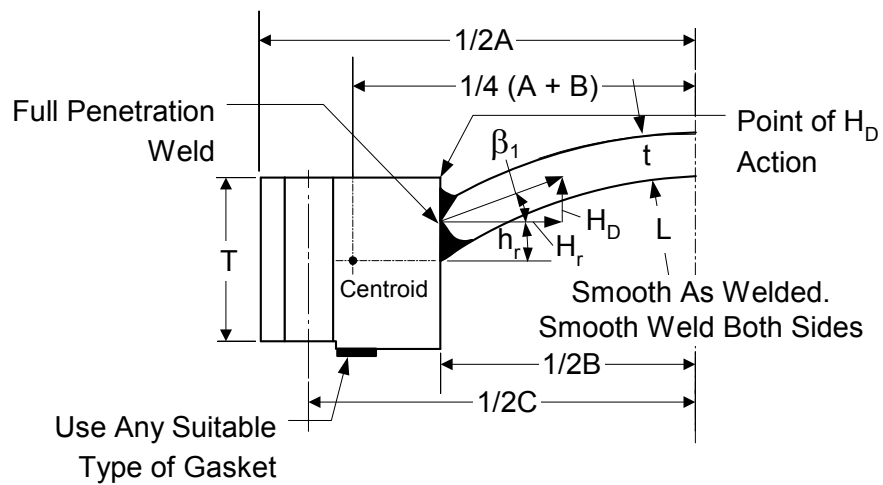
Type D Spherically Dished Cover with a Bolting Flange
